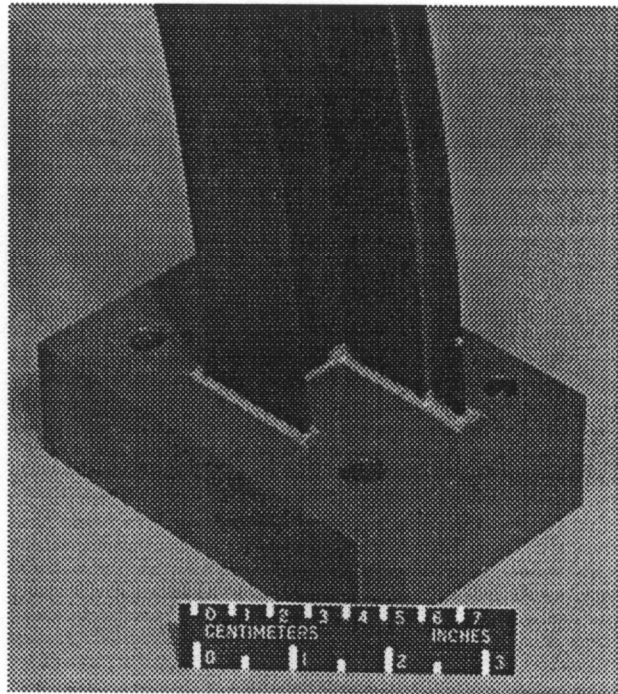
Frame Clamping Fixture—Steel Housing
